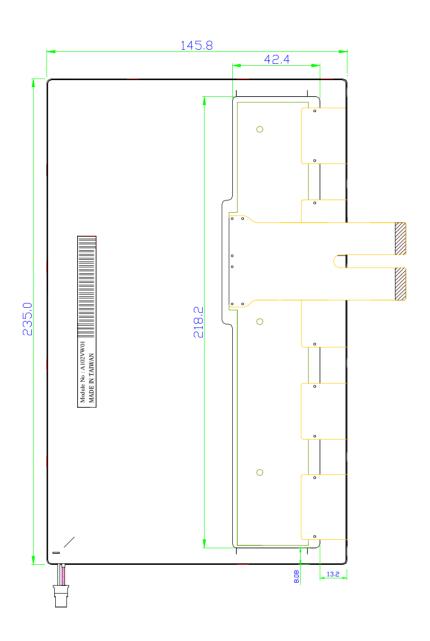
Outline dimension of TFT-LCD module (Rear Side)
